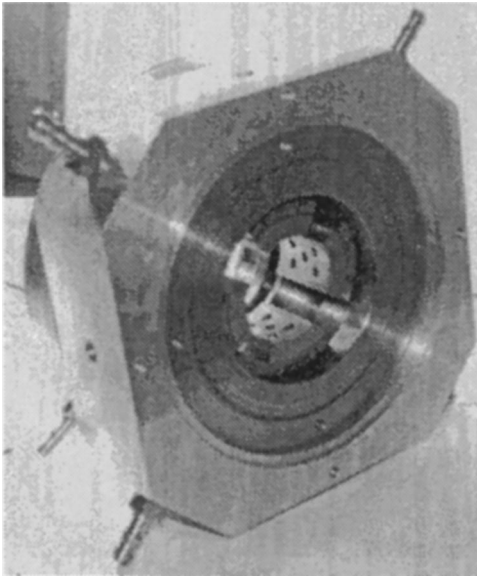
Tilting-pad journal bearing with orifices machined on the pad surfaces
